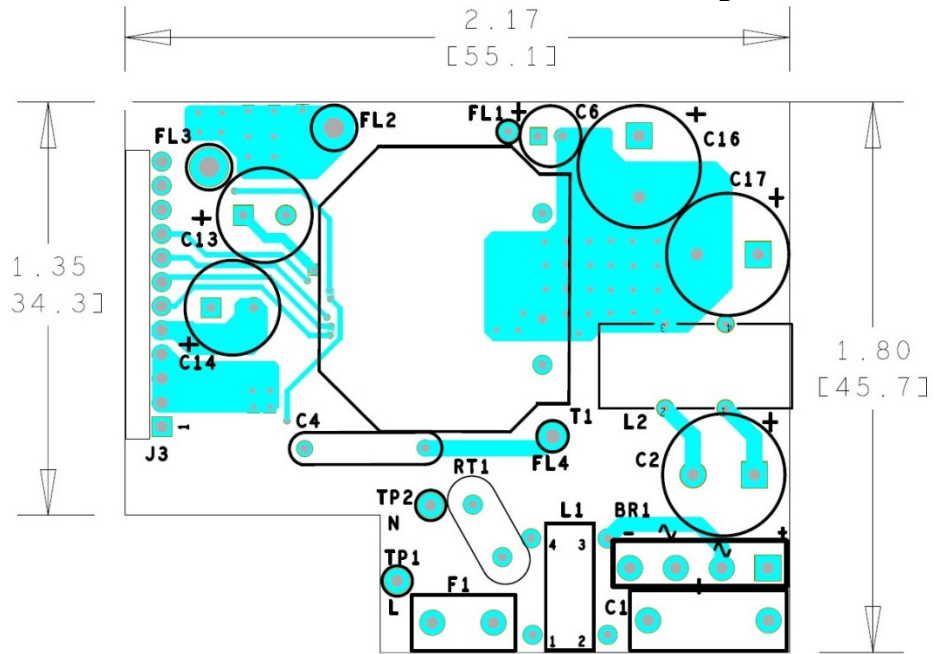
Printed Circuit Layout, Mother Board, Top.
